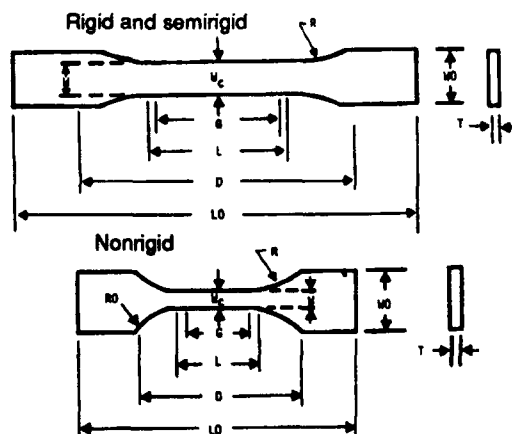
Dogbone Tensile Test Specimens [ASTM D638]
